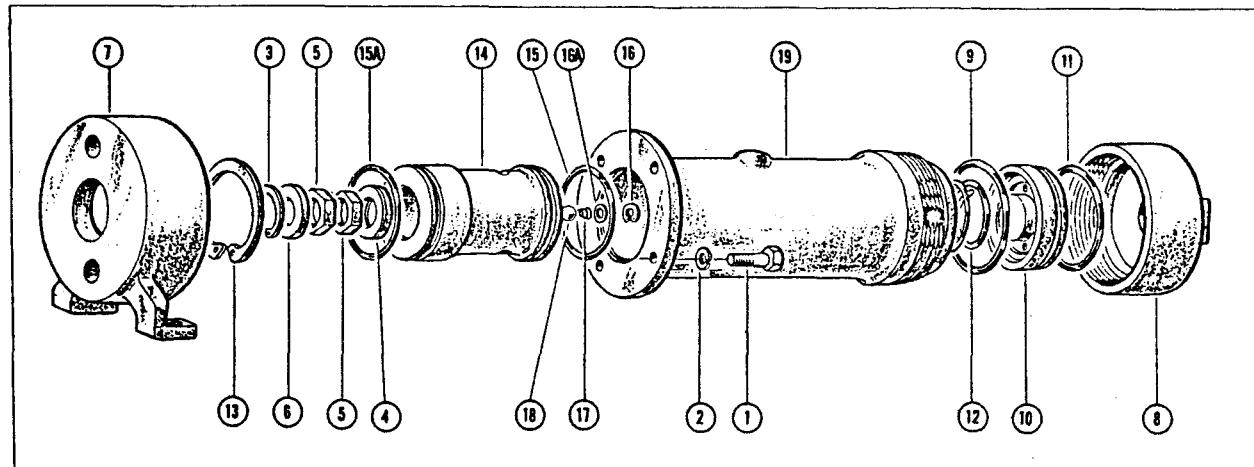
Exploded View, 87-76-1 Master Cylinder Assembly
